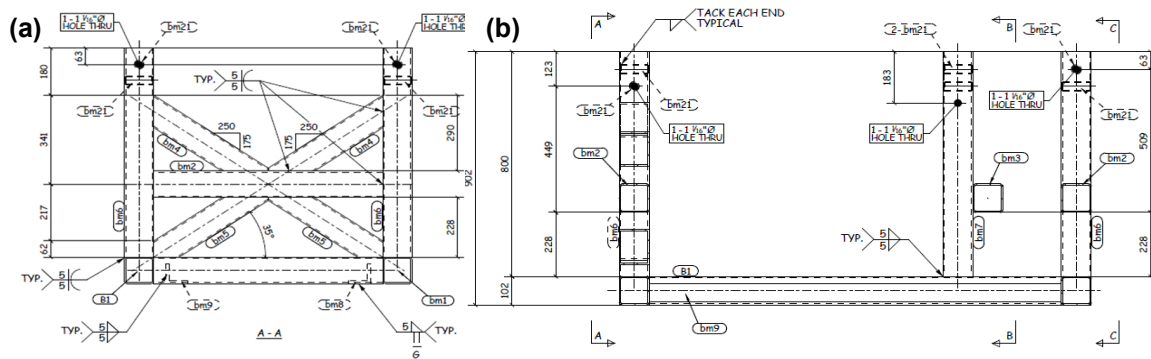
Test frame fabrication drawings of (a) section view A-A, (b) elevation view. All dimensions in mm.
